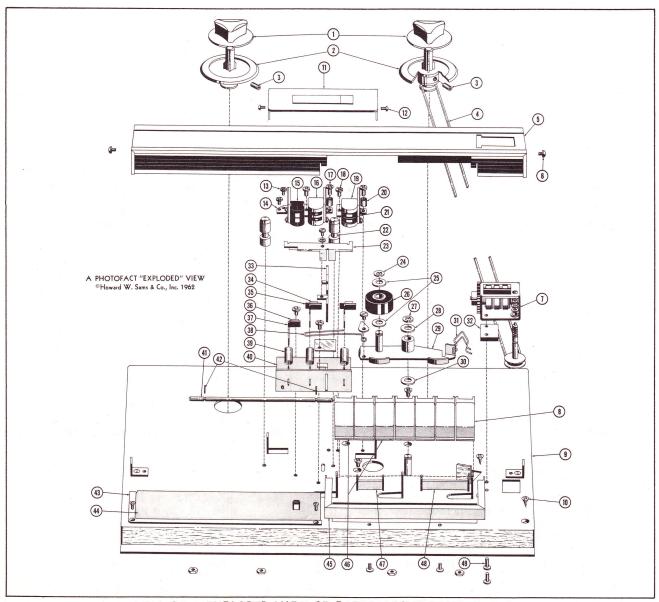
A EXPLODED VIEW OF PARTS ABOVE DECK ASSEMBLY
